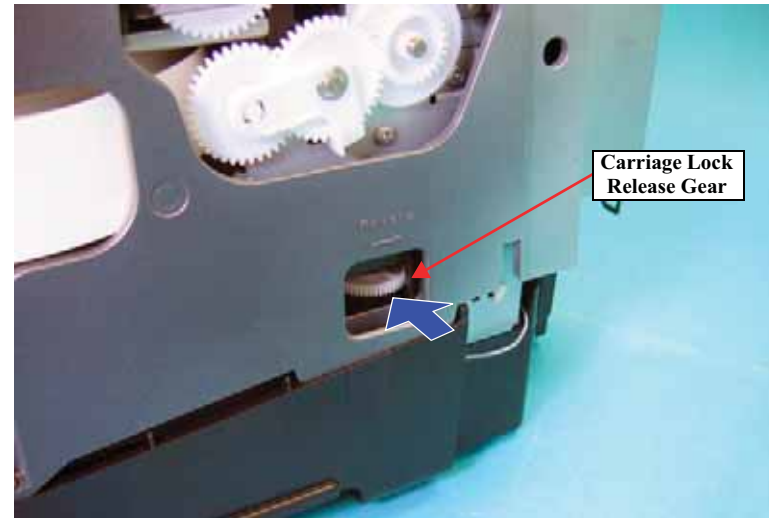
Unlocking the CARRIAGE, ASSY.
